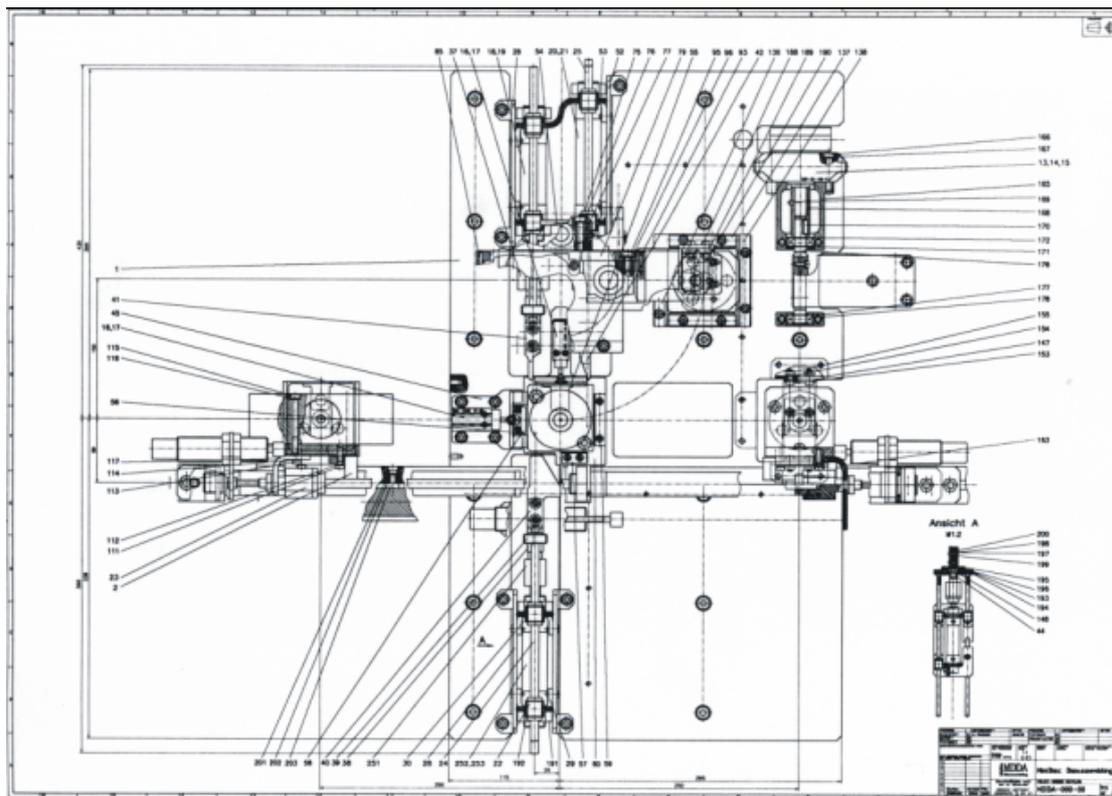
Layout of the disassembly cell for PCB's (Kopacek, Noe, 2001)
